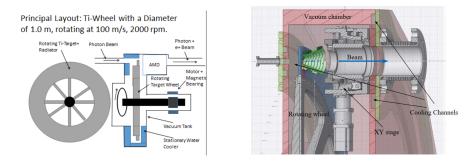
Left panel: Rotating target wheel in vacuum, cooled via radiation only with magnetic bearings as support elements; the vacuum tank is cooled via a stationary water cooler [13]. Right panel: Technical drawings of the support elements and the magnetic bearings [15].
